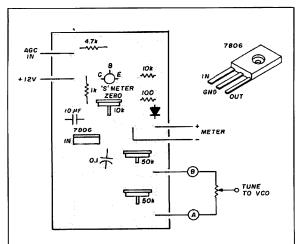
Parts placement guide for the voltage-regulator/S-meter board, component-side view with a printed circuit board in the background.
